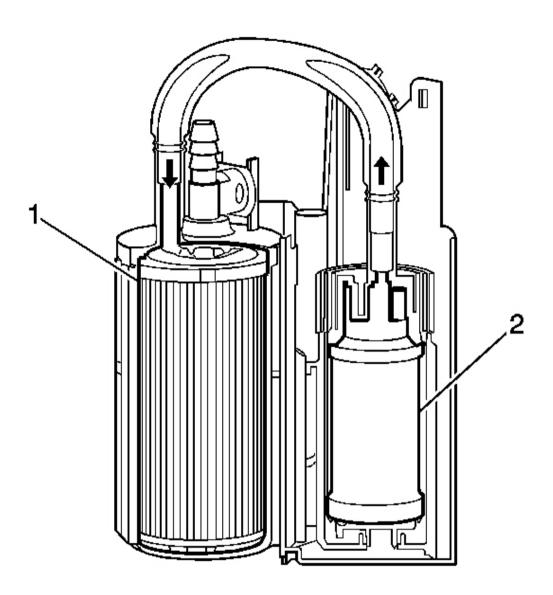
View Of Fuel Pump Courtesy of GENERAL MOTORS CORP.
